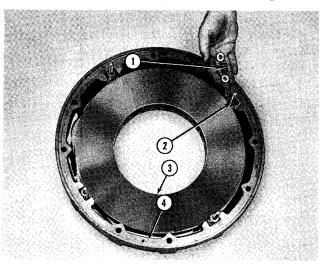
REMOVING SEPARATOR SPRINGS
